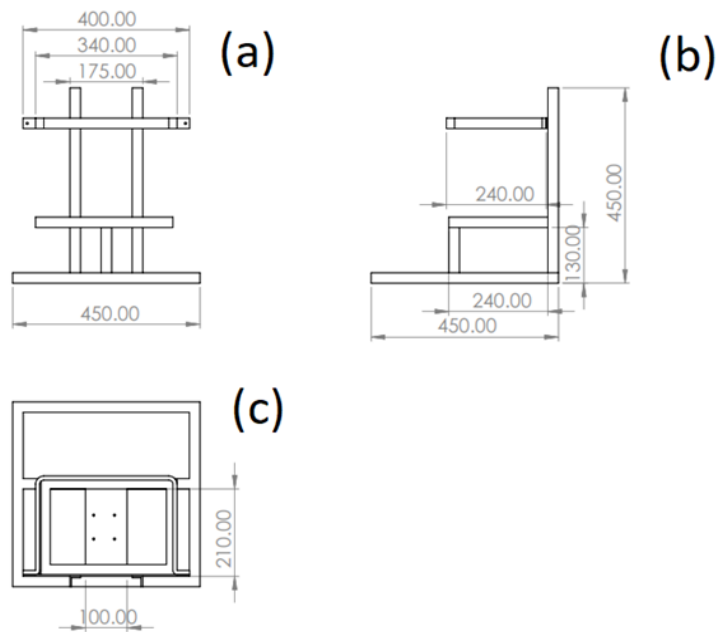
(a) Front view, (b) side view, and (c) top view of the Portable nozzle testing setup.
